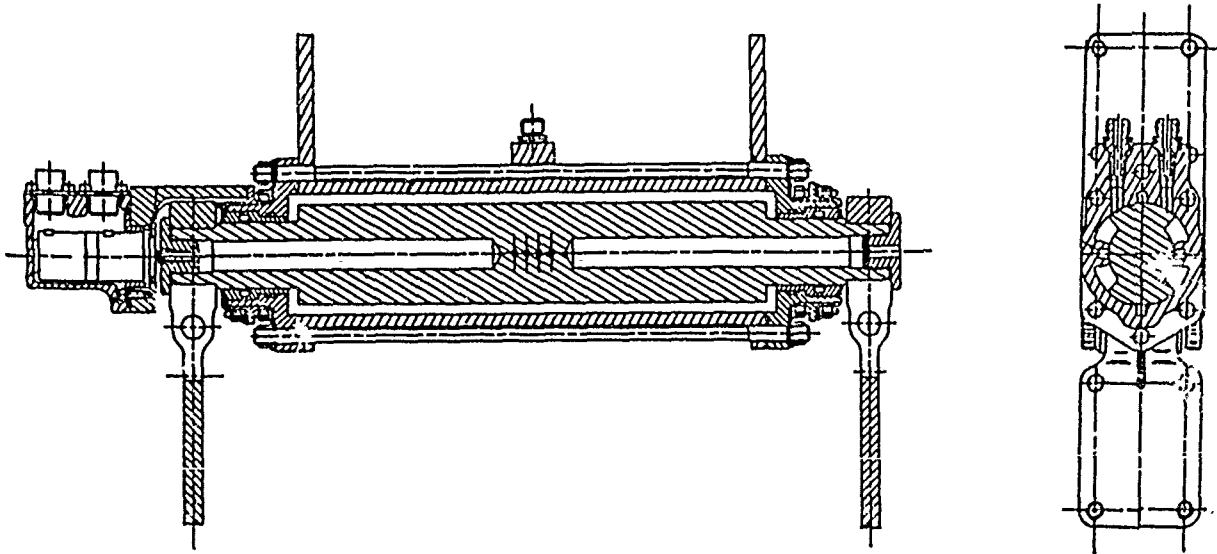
Bendix - Rotary Vane Actuator Detail Drawing
